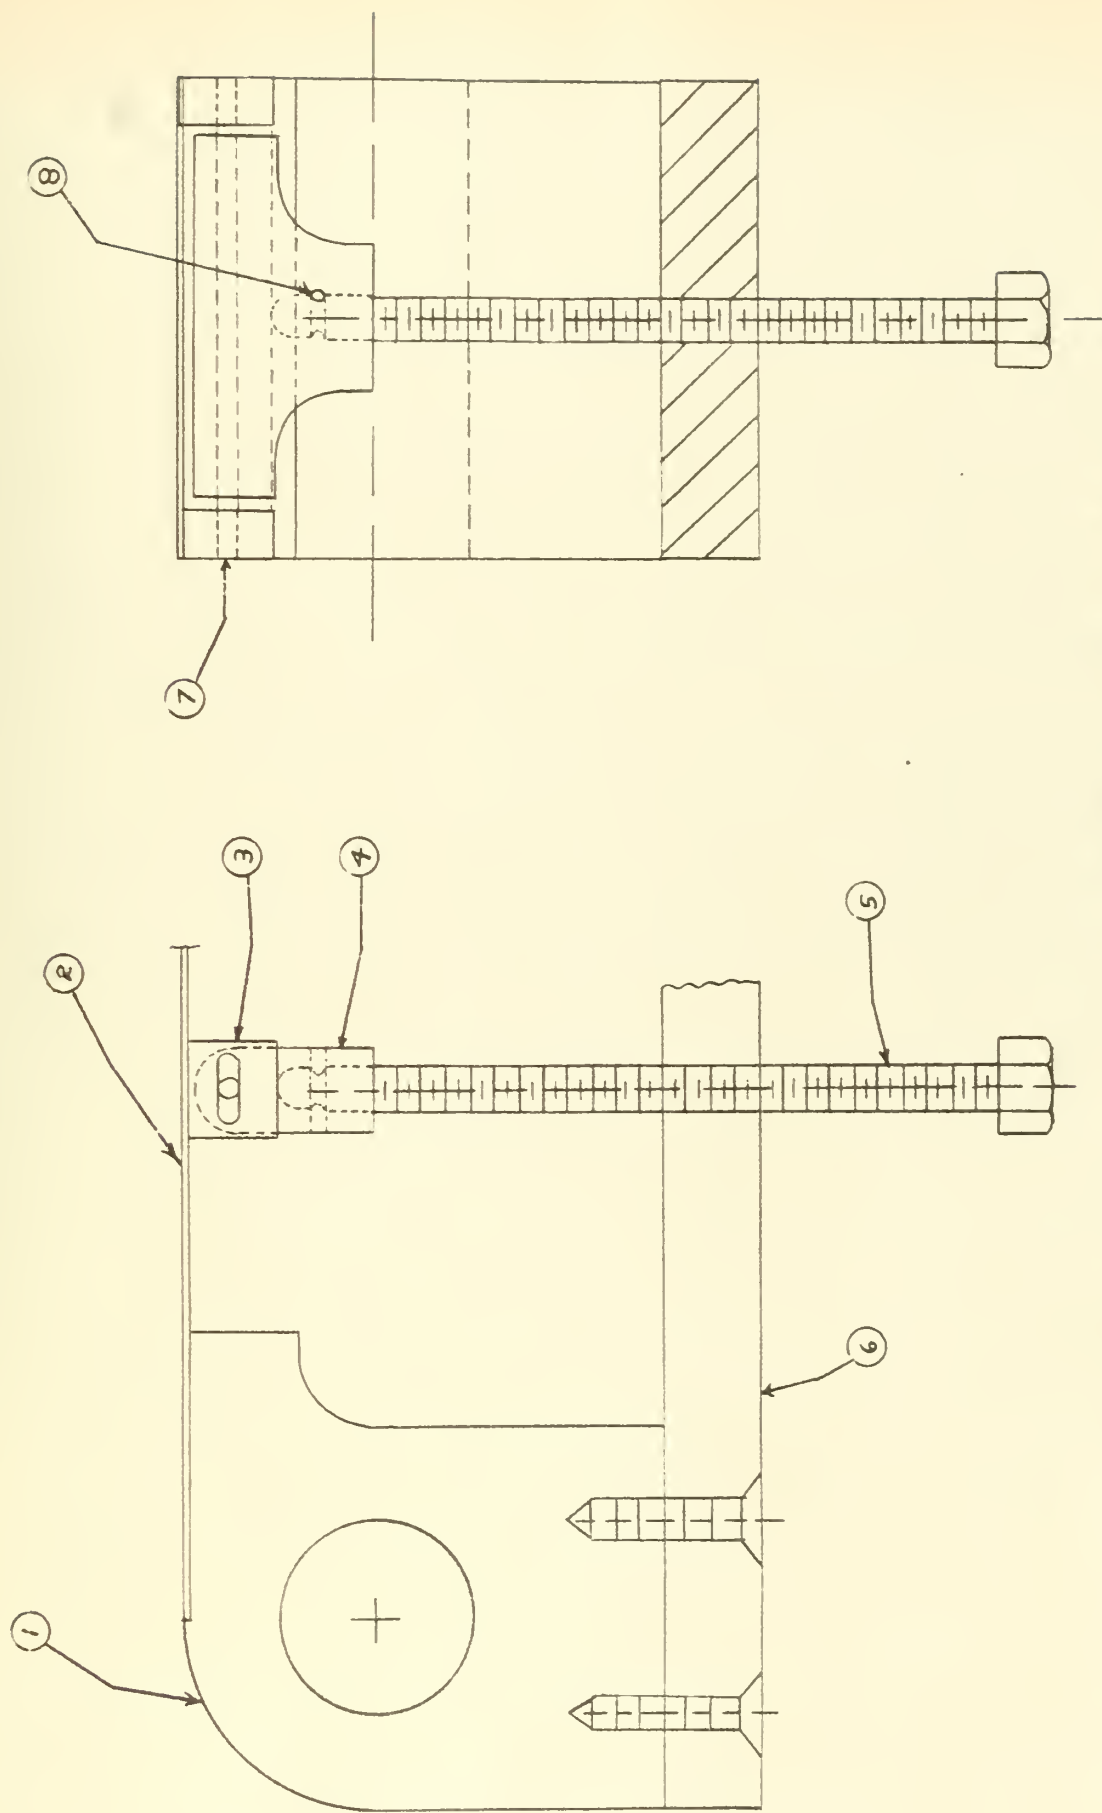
Upper And Lower Wall Modification Showing: 1- End Piece; 2- Wall; 3- Support Bracket; 4- Threaded Screw Holder; 5- Threaded Screw; 6- Bottom Piece; 7- Roller; 8- Pin.
